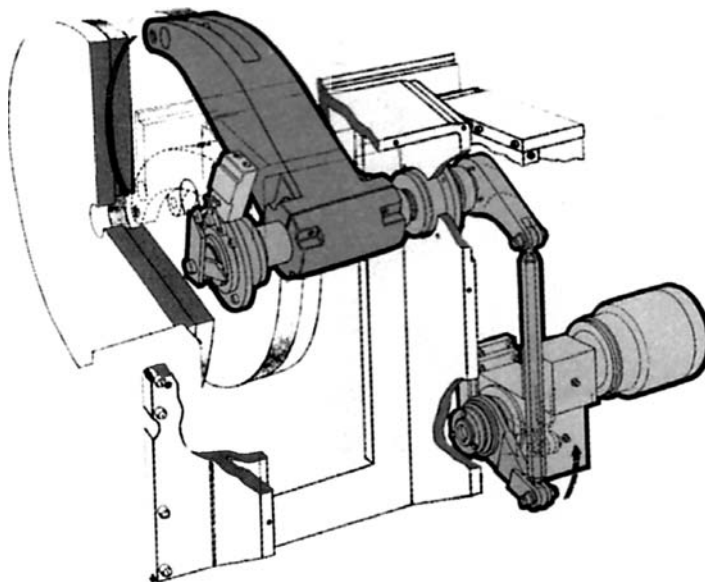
Components of a double-disc grinder wheel spindle unit.
